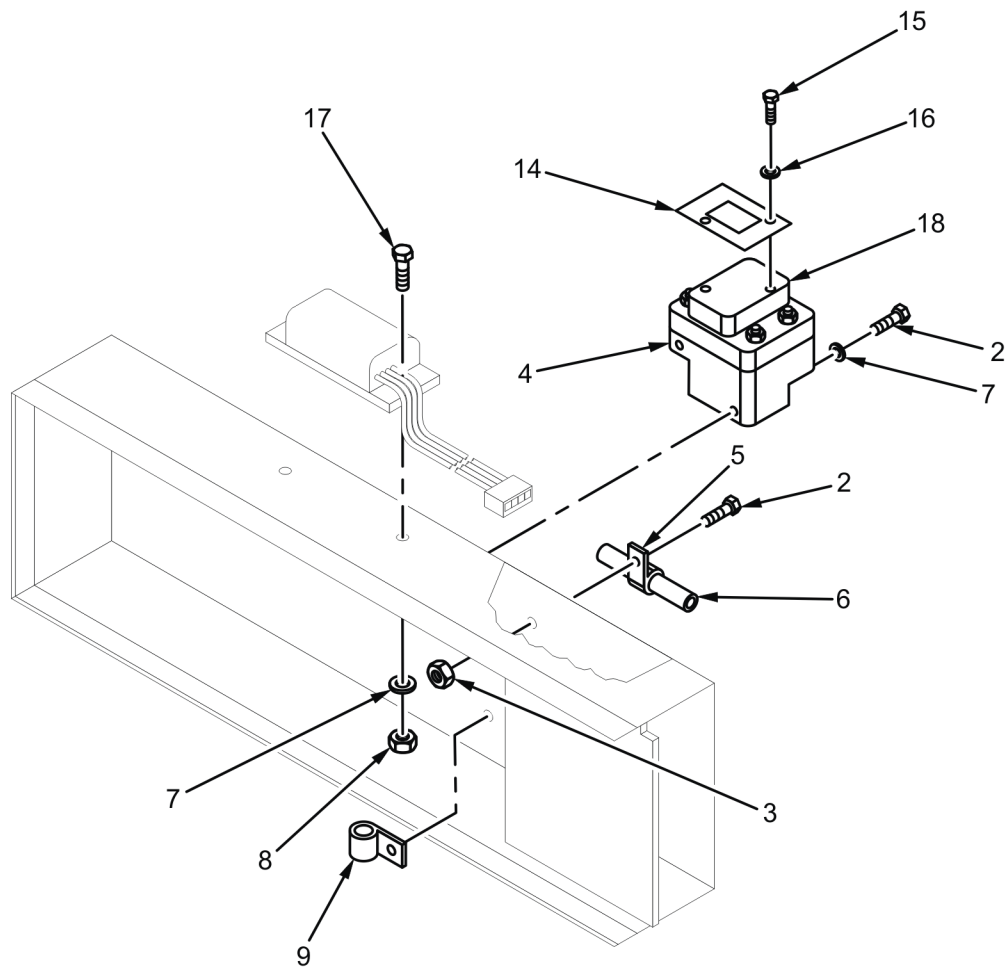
CONTACTOR ASSEMBLY (Sheet 2 of 2).
